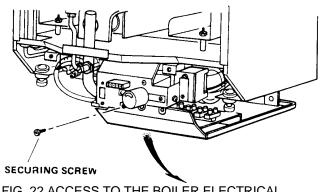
ACCESS TO THE BOILER ELECTRICAL TERMINAL BLOCK
